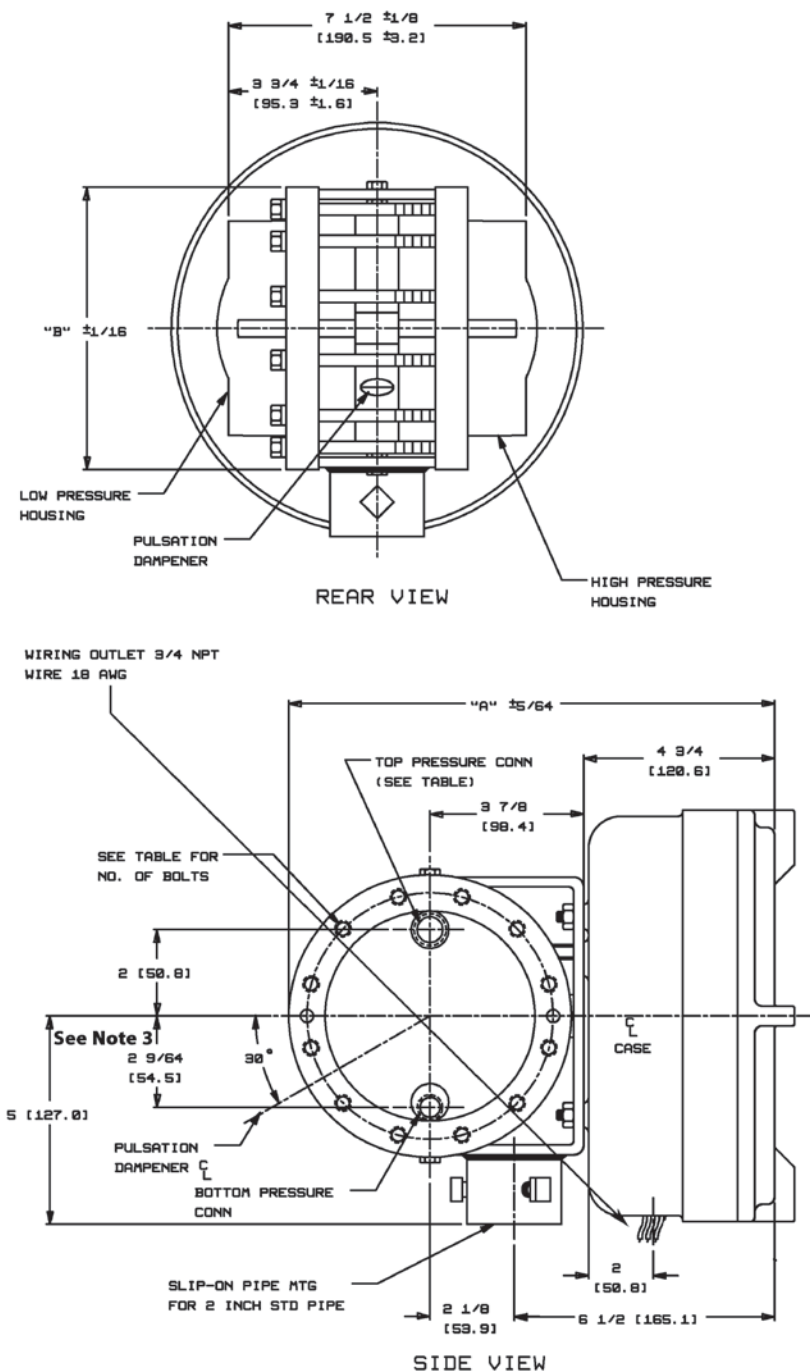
Model 291B Outside Dimensions (Part 1 of 2)
